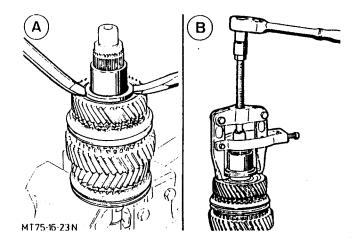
Remove 3rd gear bearing bush. Λ - Lift B - Pull off
